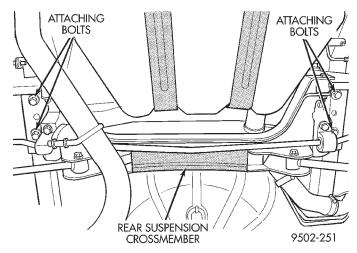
Crossmember Attachment To Frame Rails CAUTION: When lowering rear suspension crossmember do not put a strain on the rear brake flex hoses.
